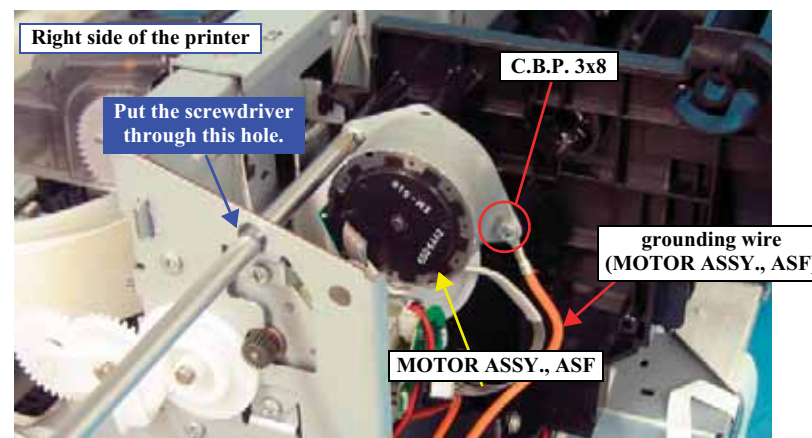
Removing the screws from the MOTOR ASSY., ASF
